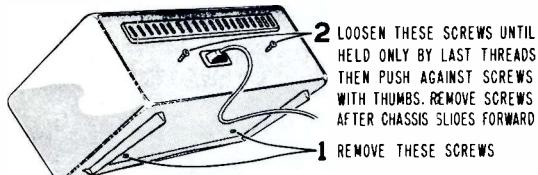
Rear View of Cabinet Showing Chassis Mounting Screws.
